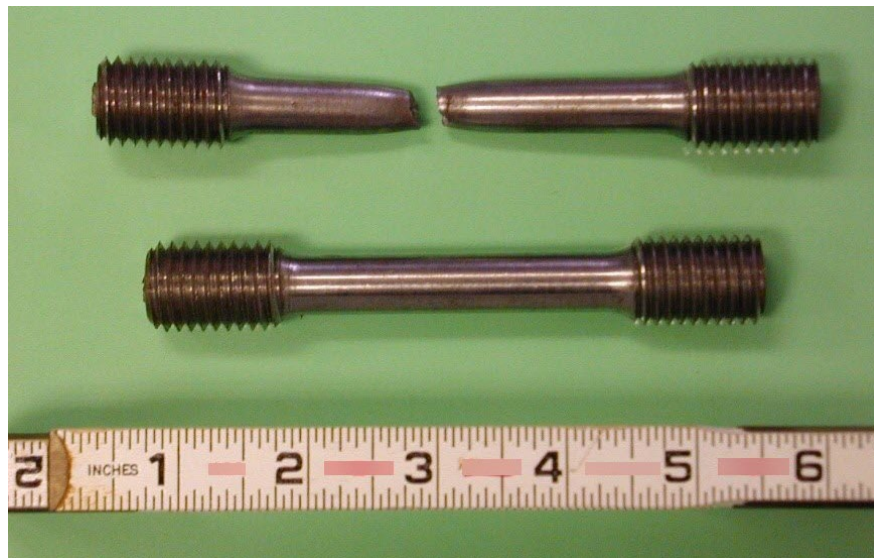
Ductile Failure of Cold Rolled Steel
